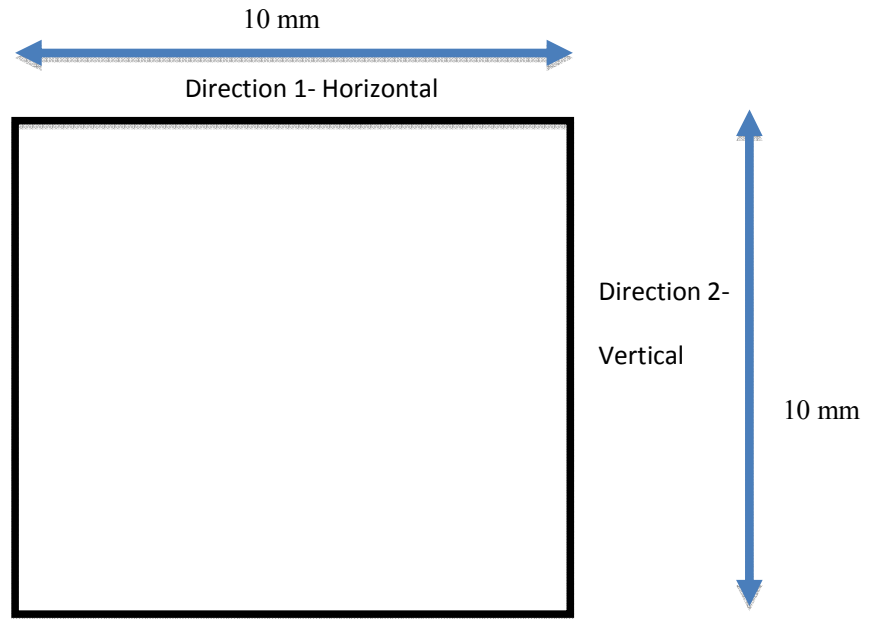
The workpiece machined by milling machining using crude palm oil (CPO) as cutting fluid
